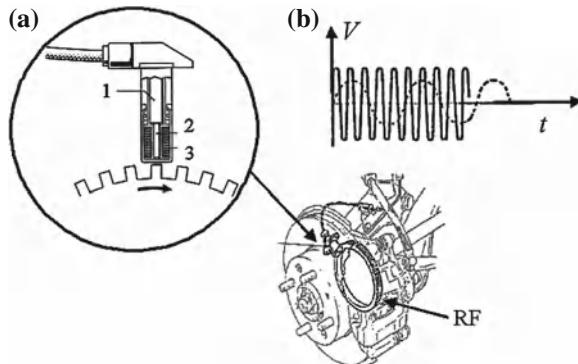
Installation scheme for a wheel speed sensor; RF is the gear wheel. The enlargement shows the detail of the magnetic pick-up
